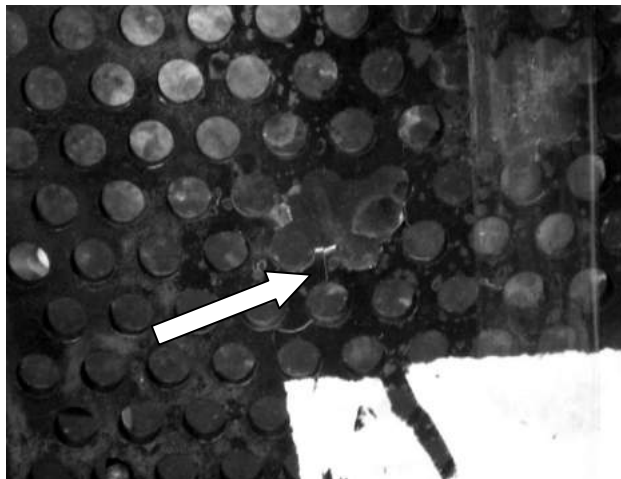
Perforated plate impact damage showing cracking between holes [9].
